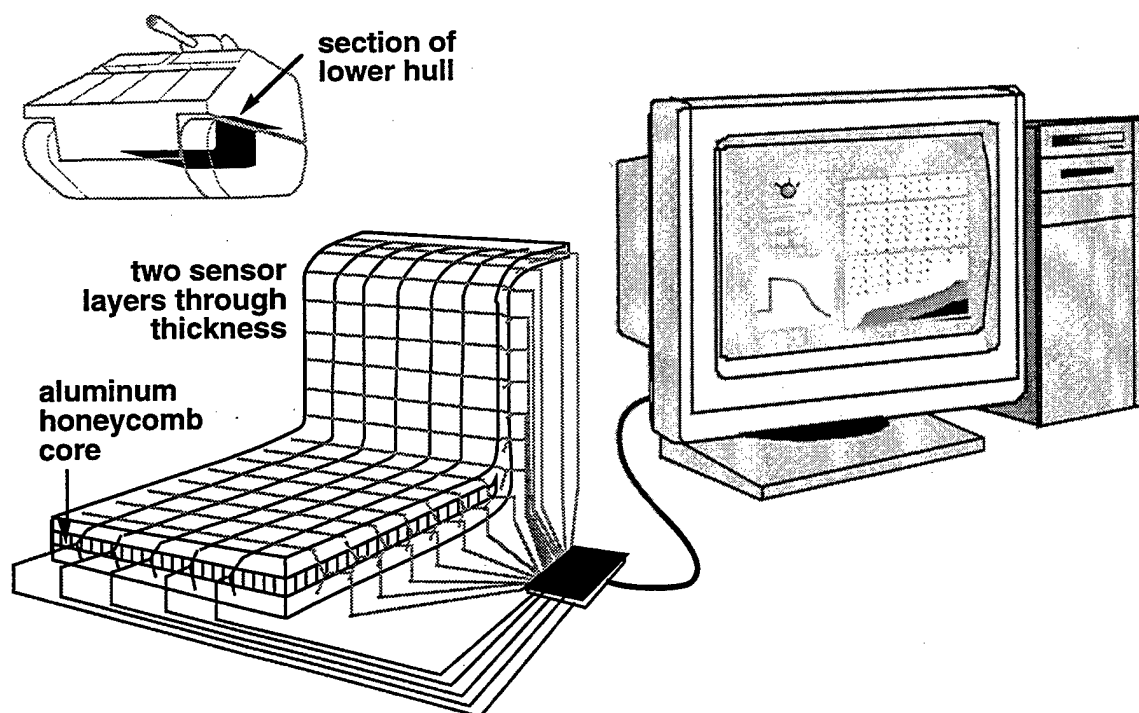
SMARTweave Technology Successfully Implemented in Manufacture of CAV Lower Hull Section at United Defense.
